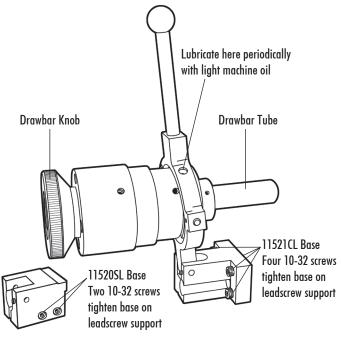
Lubrication and attachment points. Shown with P/N 11521CL base in place for the chucker lathe. The 3C LLC base, P/N 11520SL, is an available option for mounting to a standard Sherline lathe.
